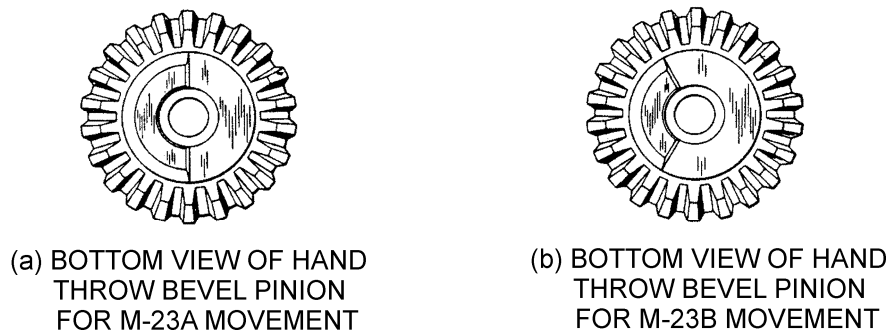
Hand-Throw Bevel Pinions (M-23 Machines)
